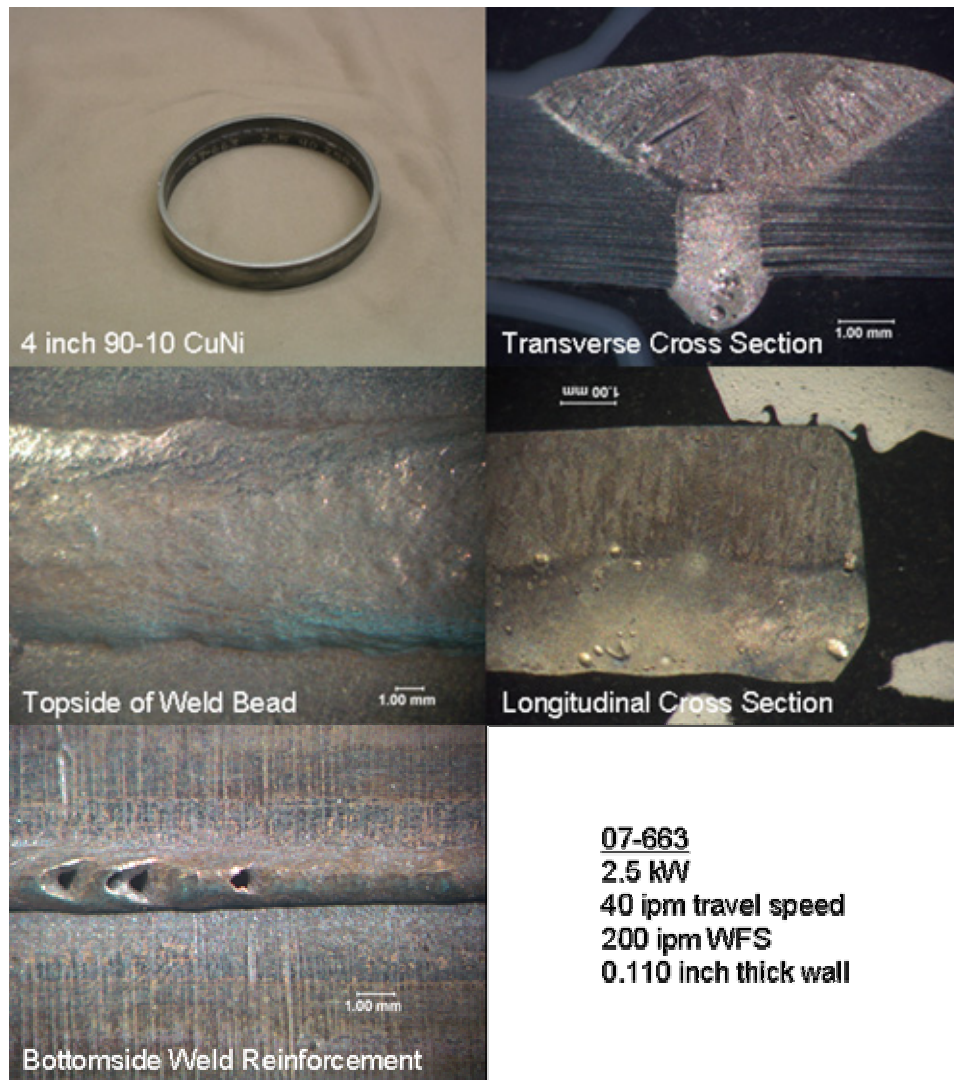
Tandem hybrid weld of 4 inch 90-10 CuNi pipe.
